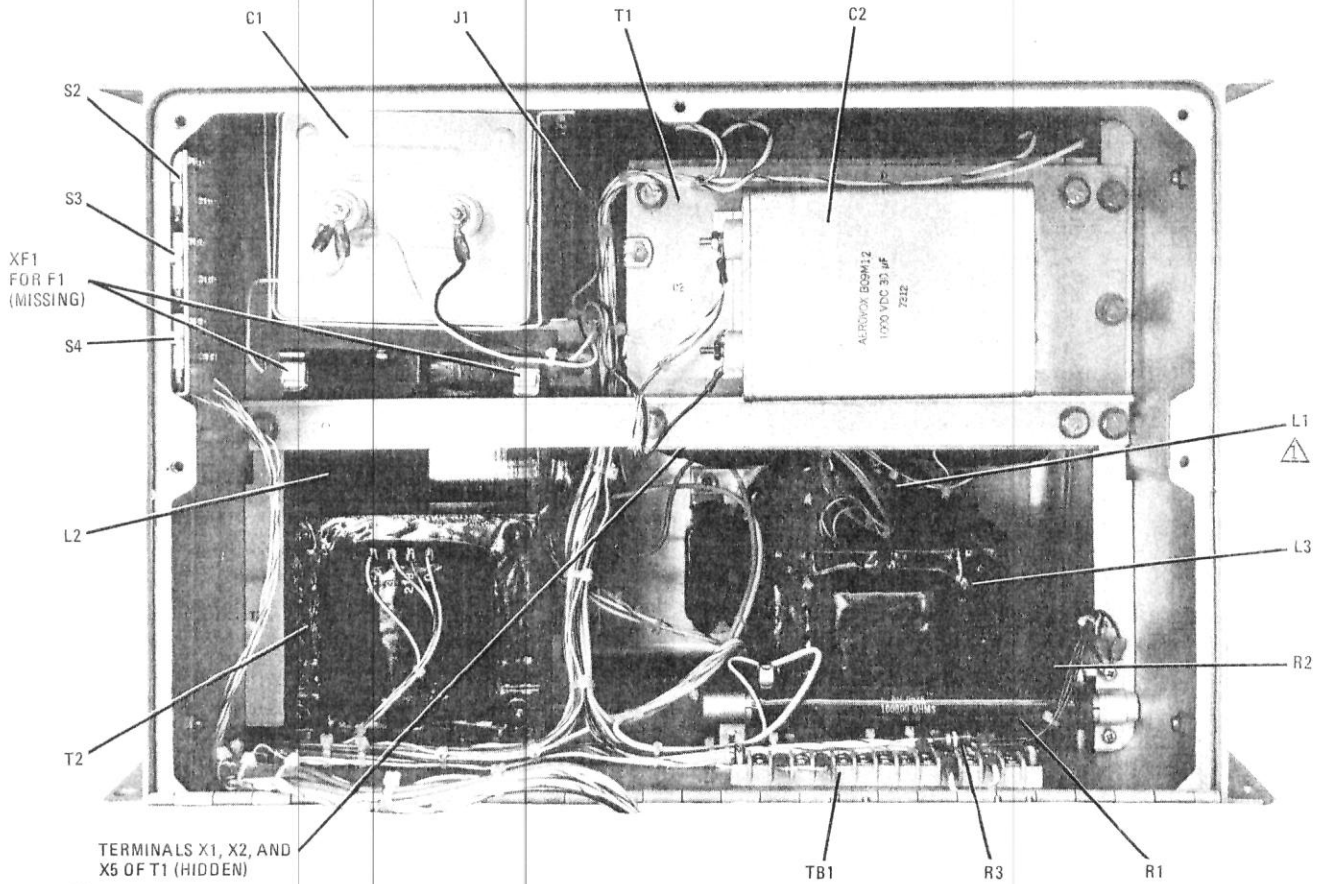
Case Assembly A2, Component Locations (Units with SN-0341 to SN-0649)
